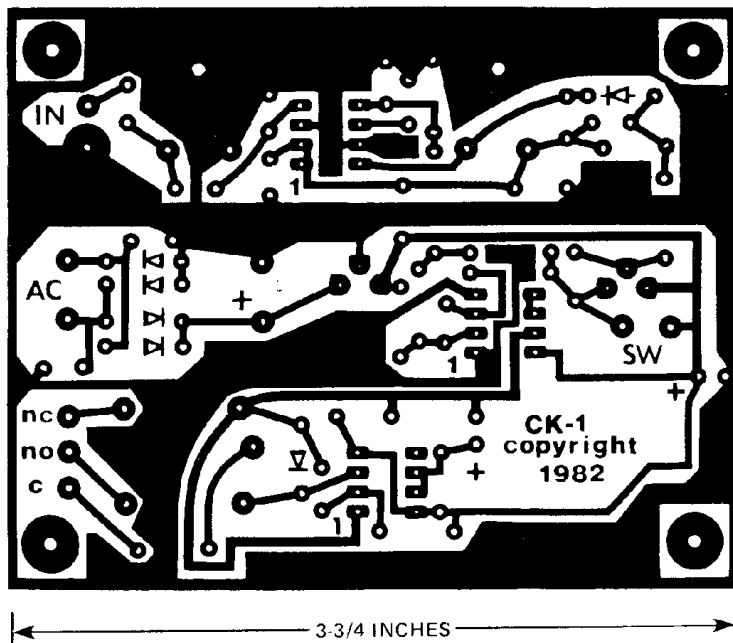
FULL-SIZE foil pattern for single-sided editor PC board.
